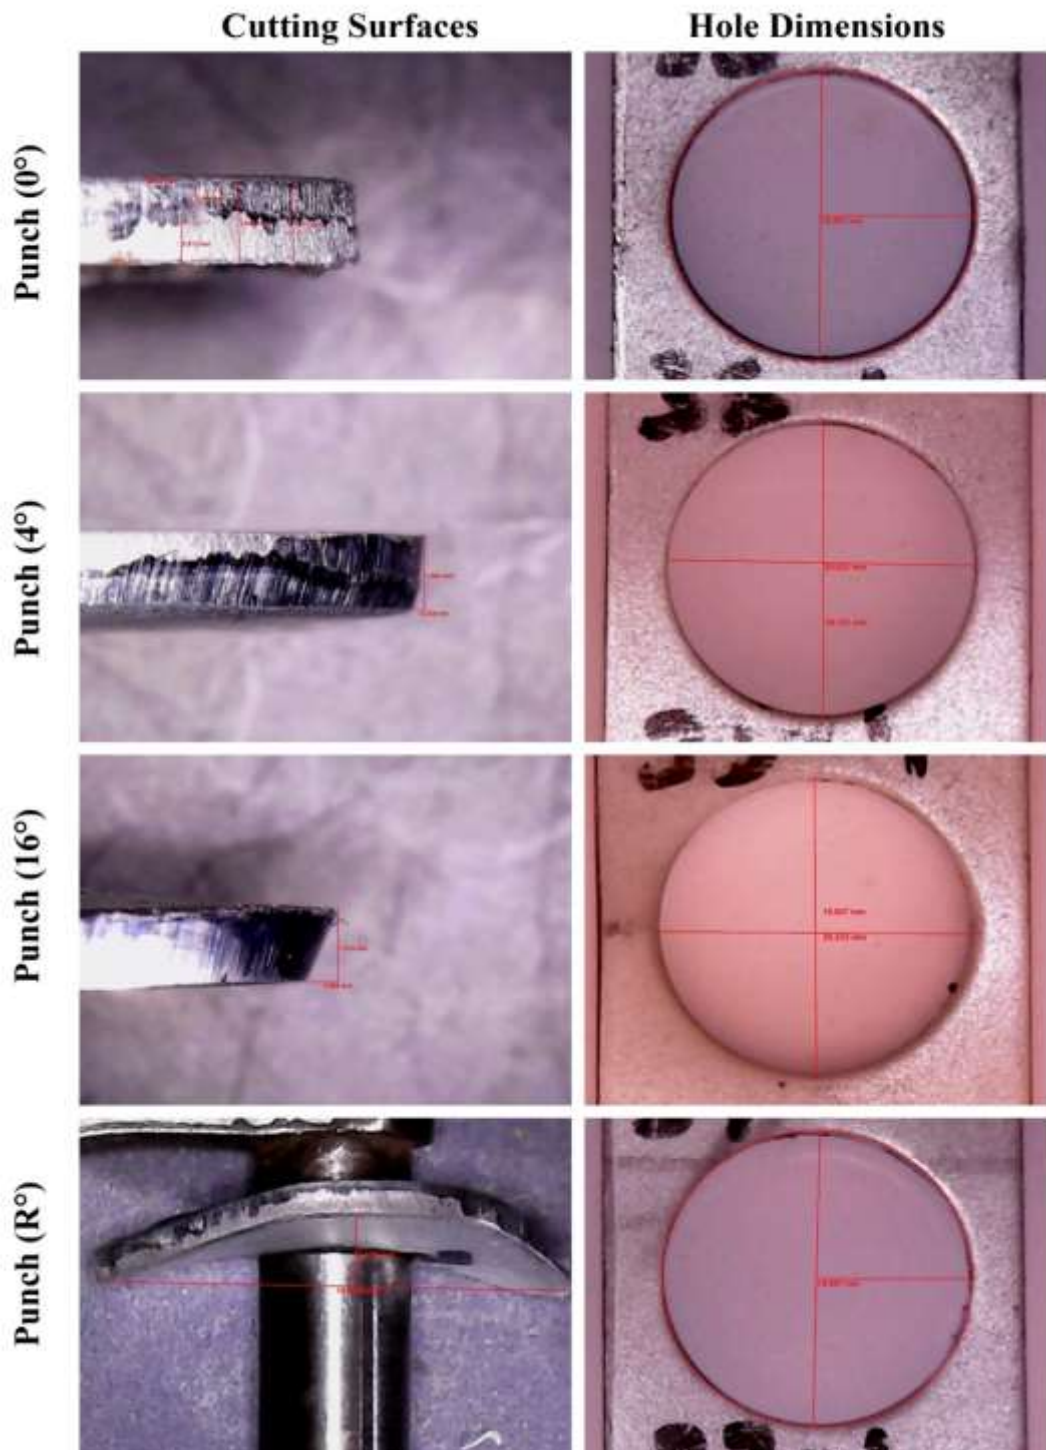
Cutting surfaces of punched parts with different punches and holes.
